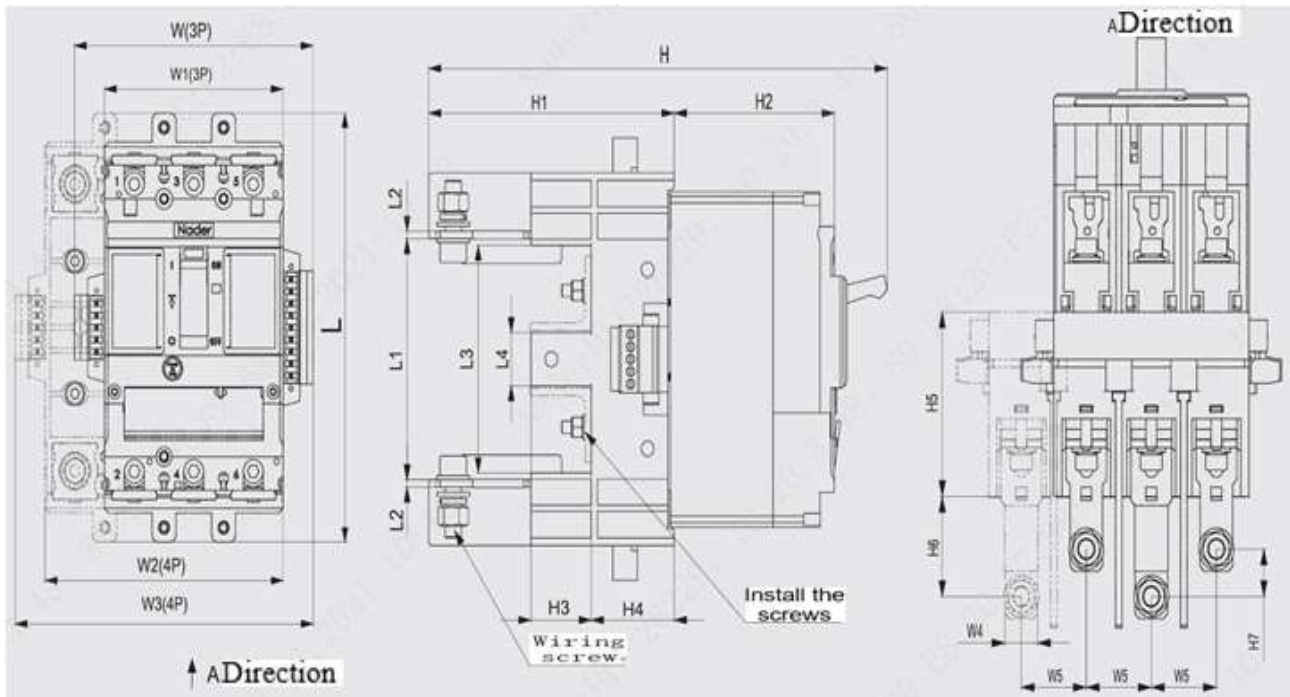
3P、4P Mounting hole dimensions of plug-in connections
